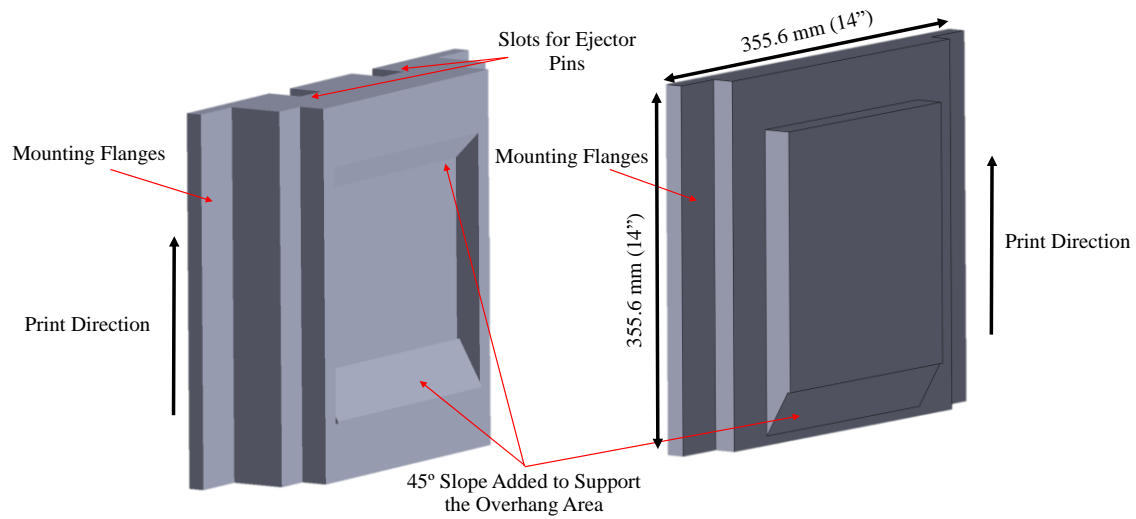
Flat AM mold (355.6 mm x 355.6 mm) design showing modifications adapted for printability
